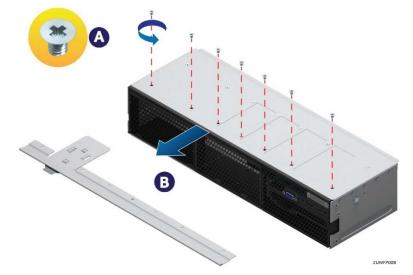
R2000WFxxx Drive Bay Retention Bracket Removal
